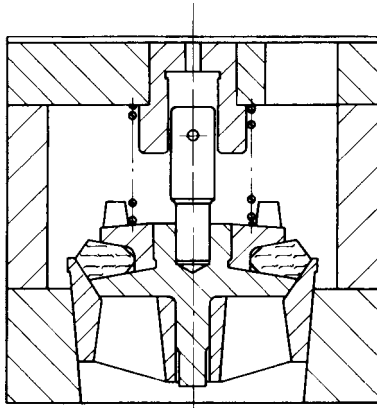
Reciprocating pump elastomeric-insert valve. (TRW-Mission Manufacturing Co.)
